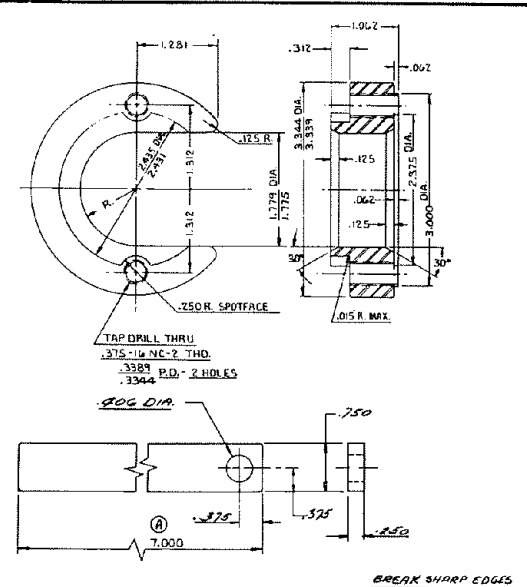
COUNTERSHAFT-REAR BUSHING AND RETAINER
